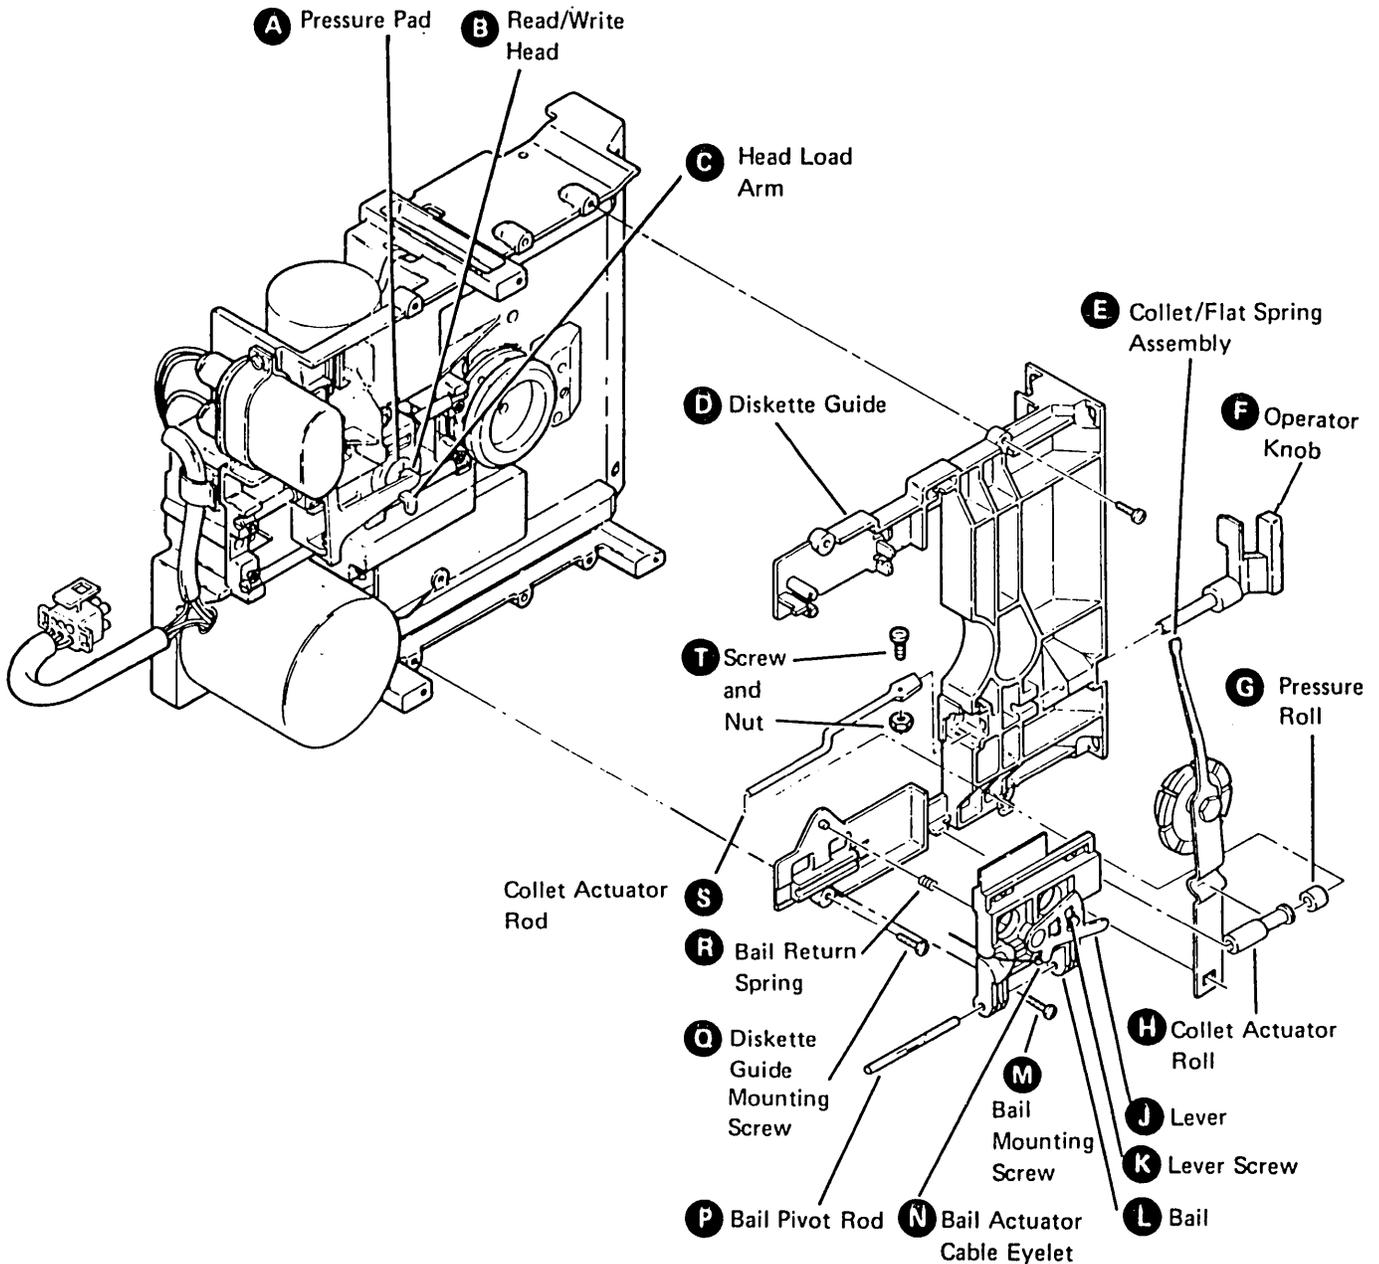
(Part 1 of 2). Collet/Flat Spring Removal
